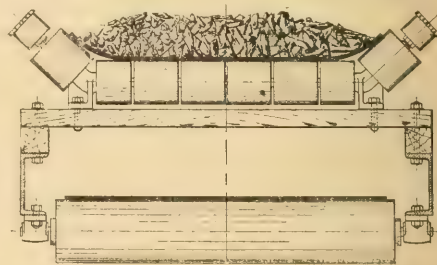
DETAILS OF SUPPORTING ROLLERS.
